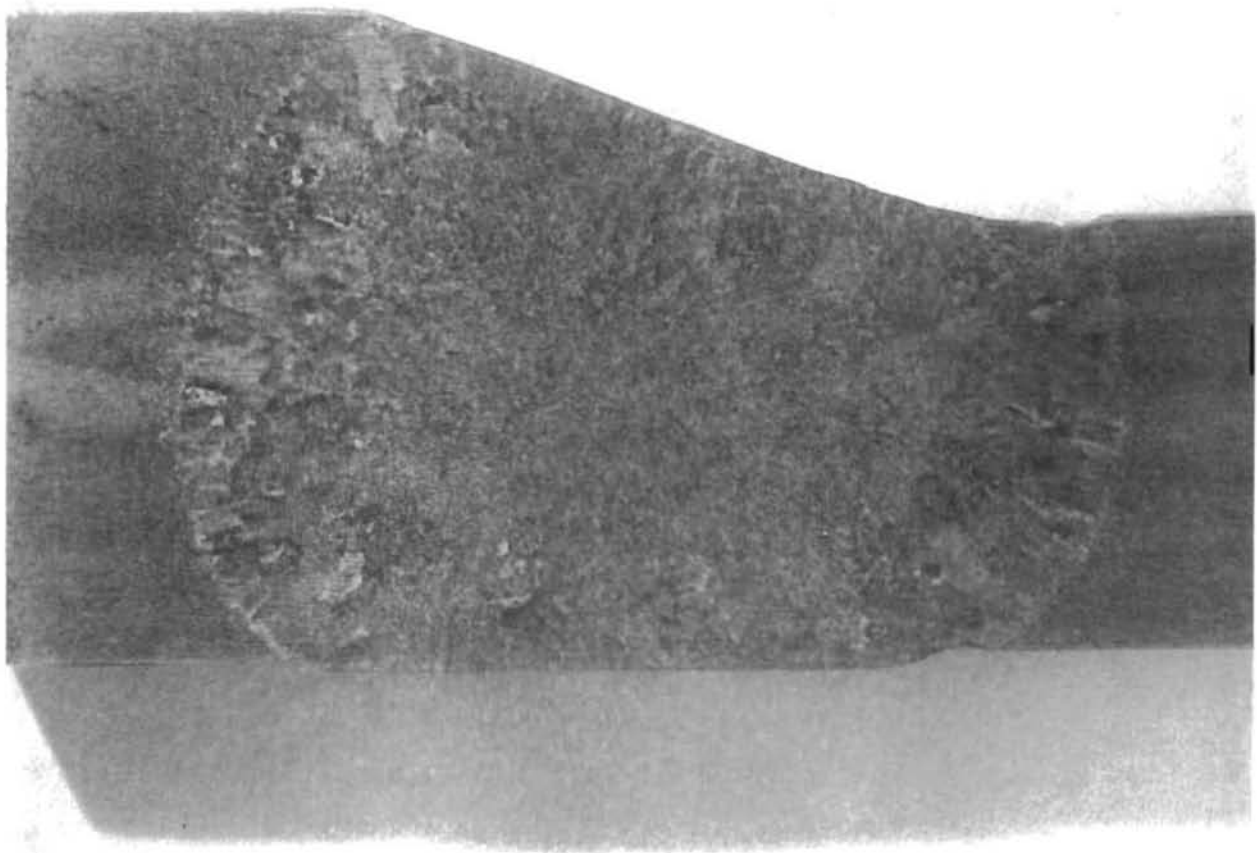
A butt weld between 1-1/2-inch plate and 1-inch plate.
